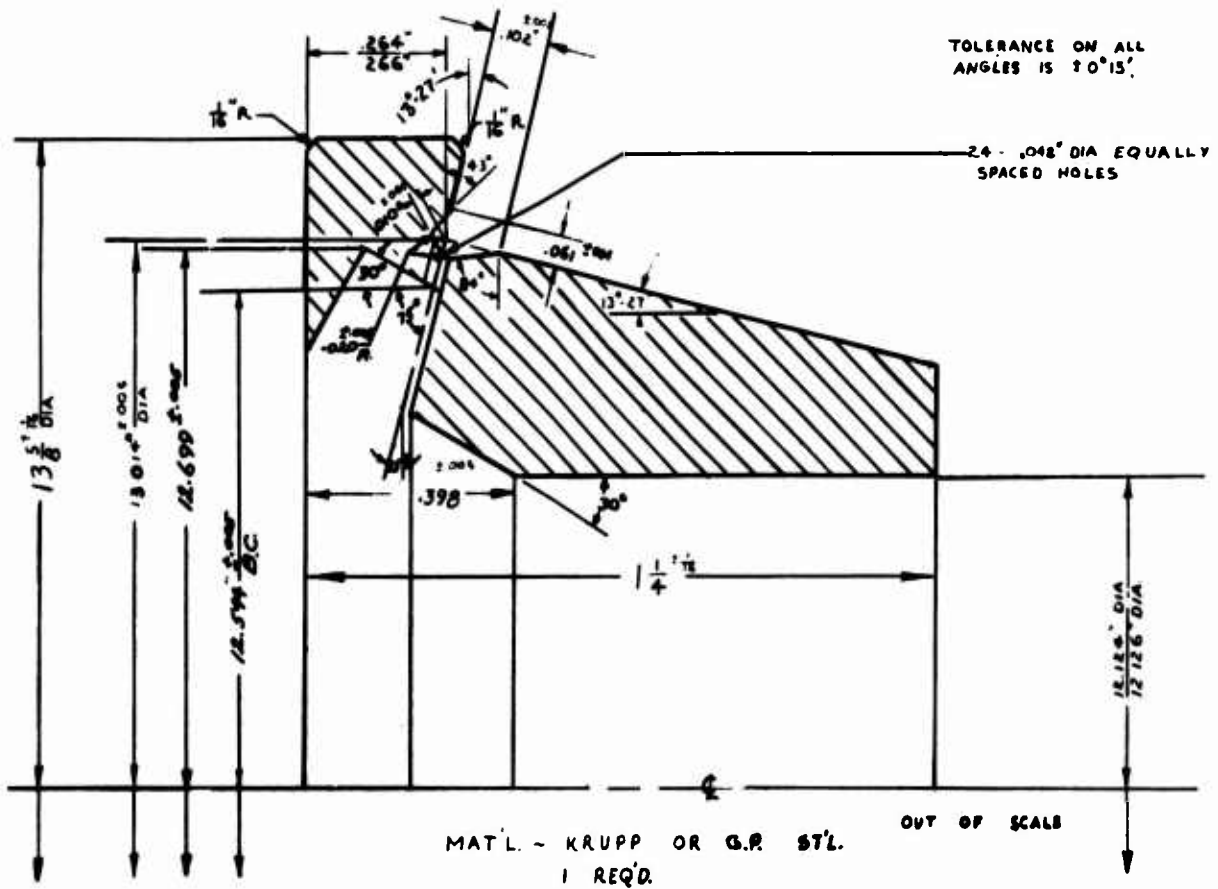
Simulated Cone (EX12088) With Test Number 2 Manifold Modified.
